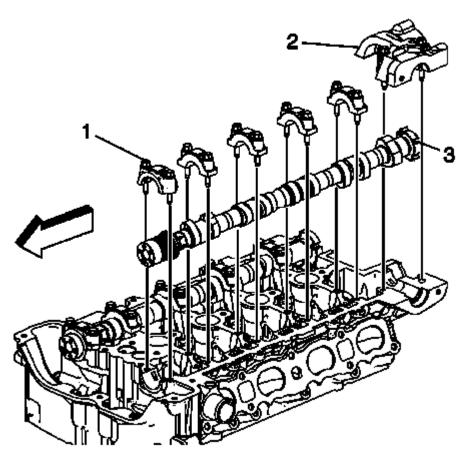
Identifying Cylinder Head Opening Courtesy of GENERAL MOTORS COMPANY
